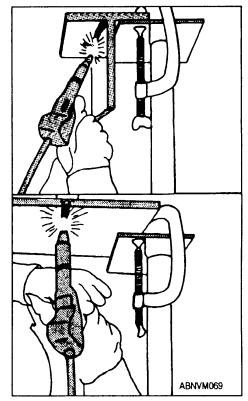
Welding overhead multipass fillet and butt welds.
